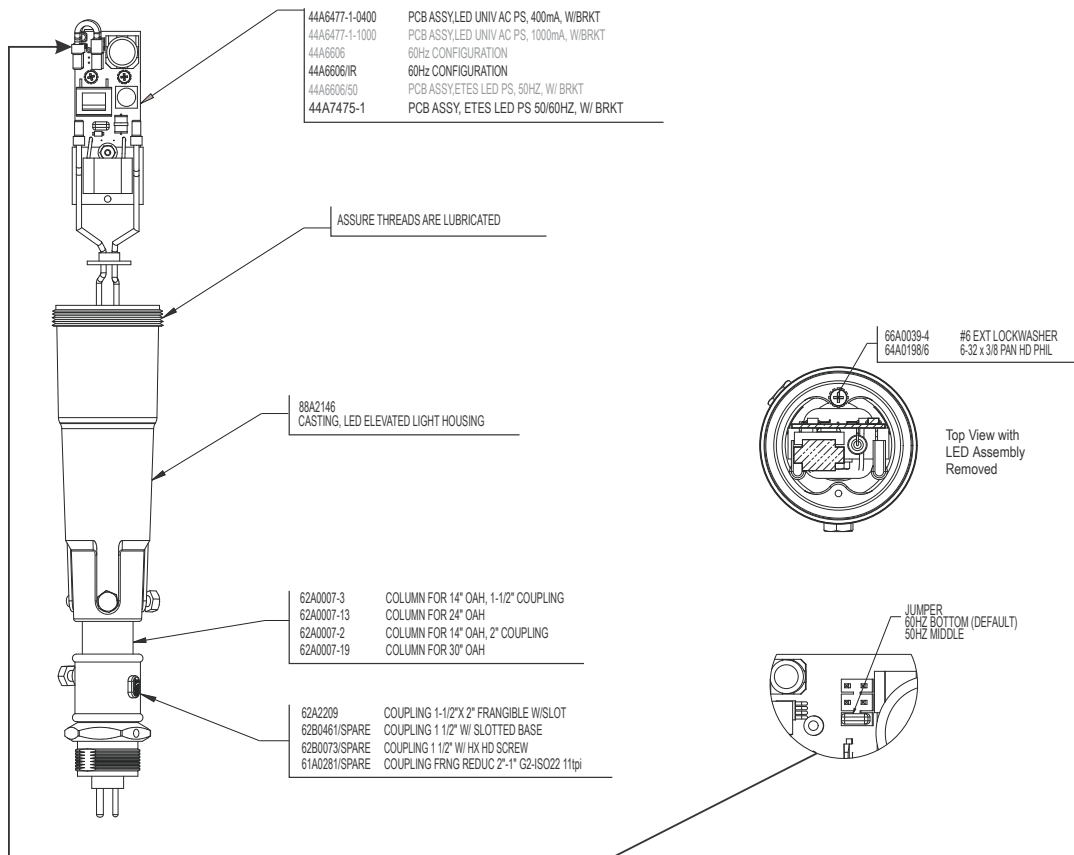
L-861T ETES Fixture and L-861T ETES (without heater)
